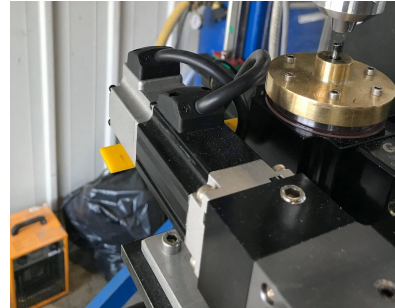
Hollow shaft Hypoid gearbox with rotary table [38].
